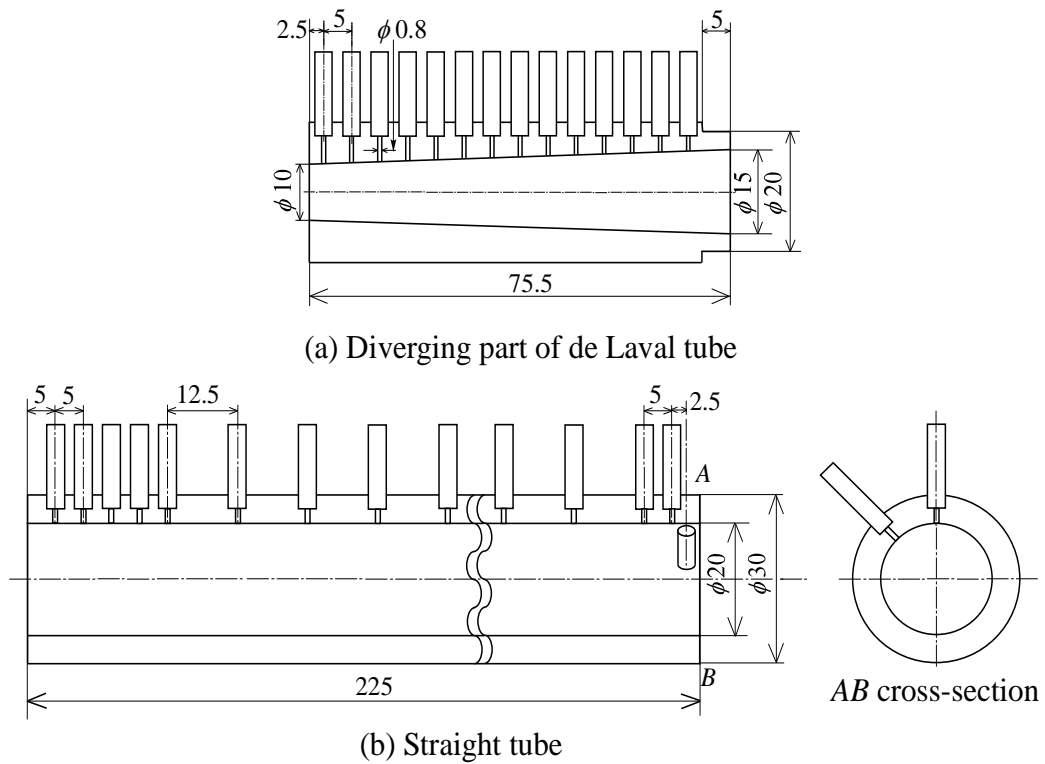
Configuration and dimension of holes for measurement of pressure (unit: mm).
